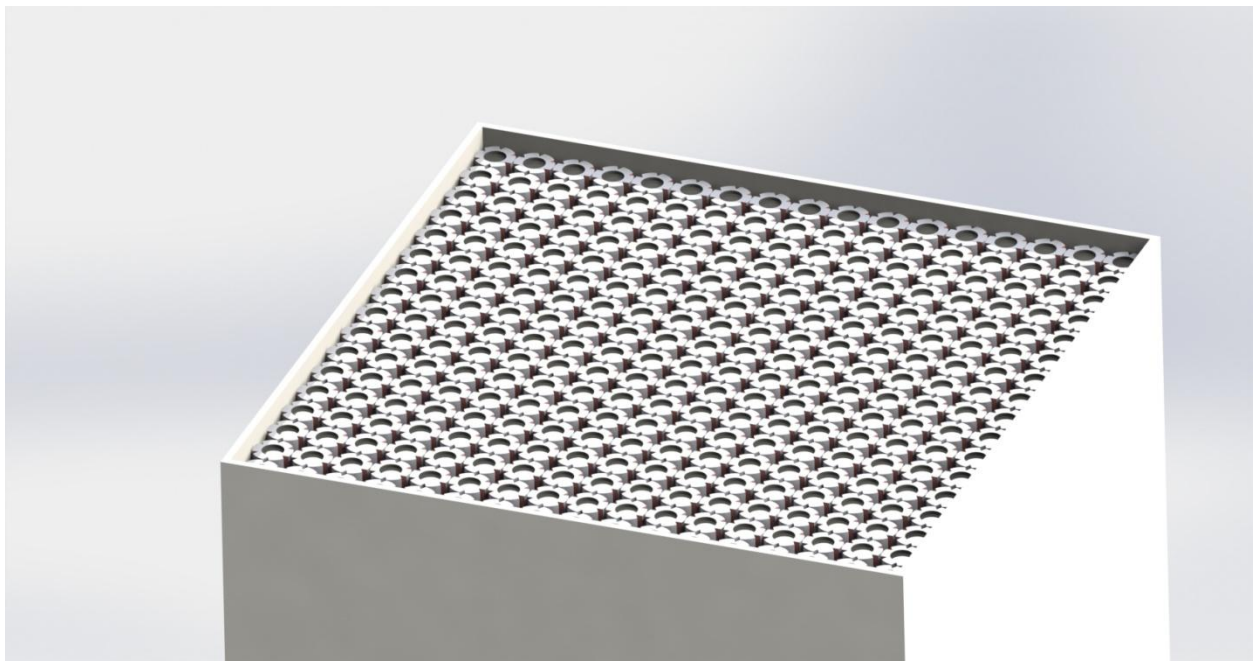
Model showing possible layout for stainless steel tubes in one of the baskets of the dry cask
